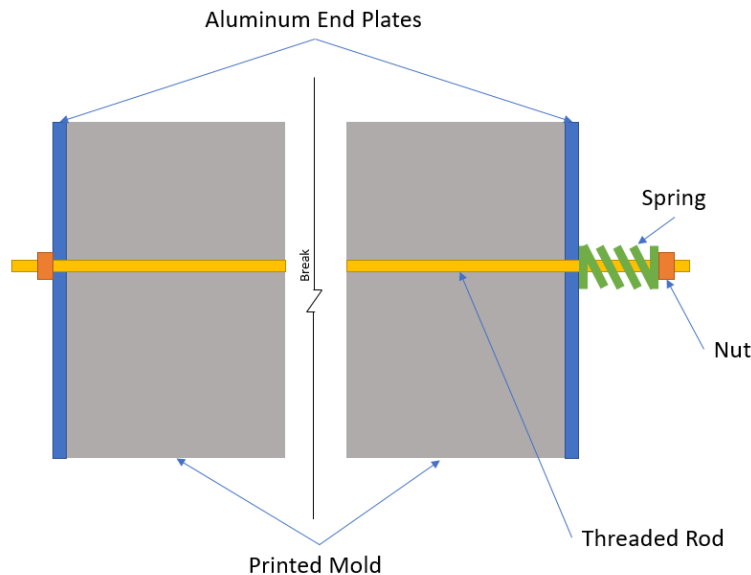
Illustration of the assembly of the mold sections using post tensioning.
